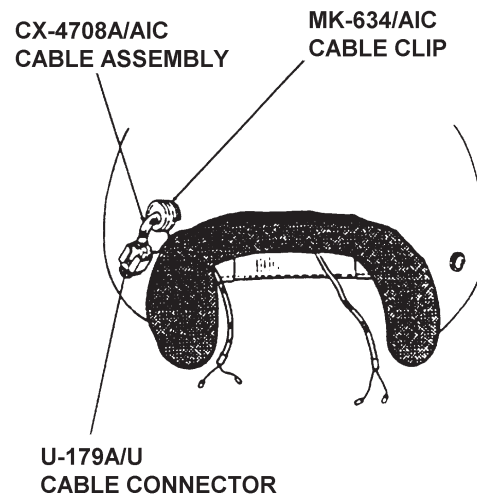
CX-4708A/AIC Cable Assembly Connector Secured to Helmet Assembly
